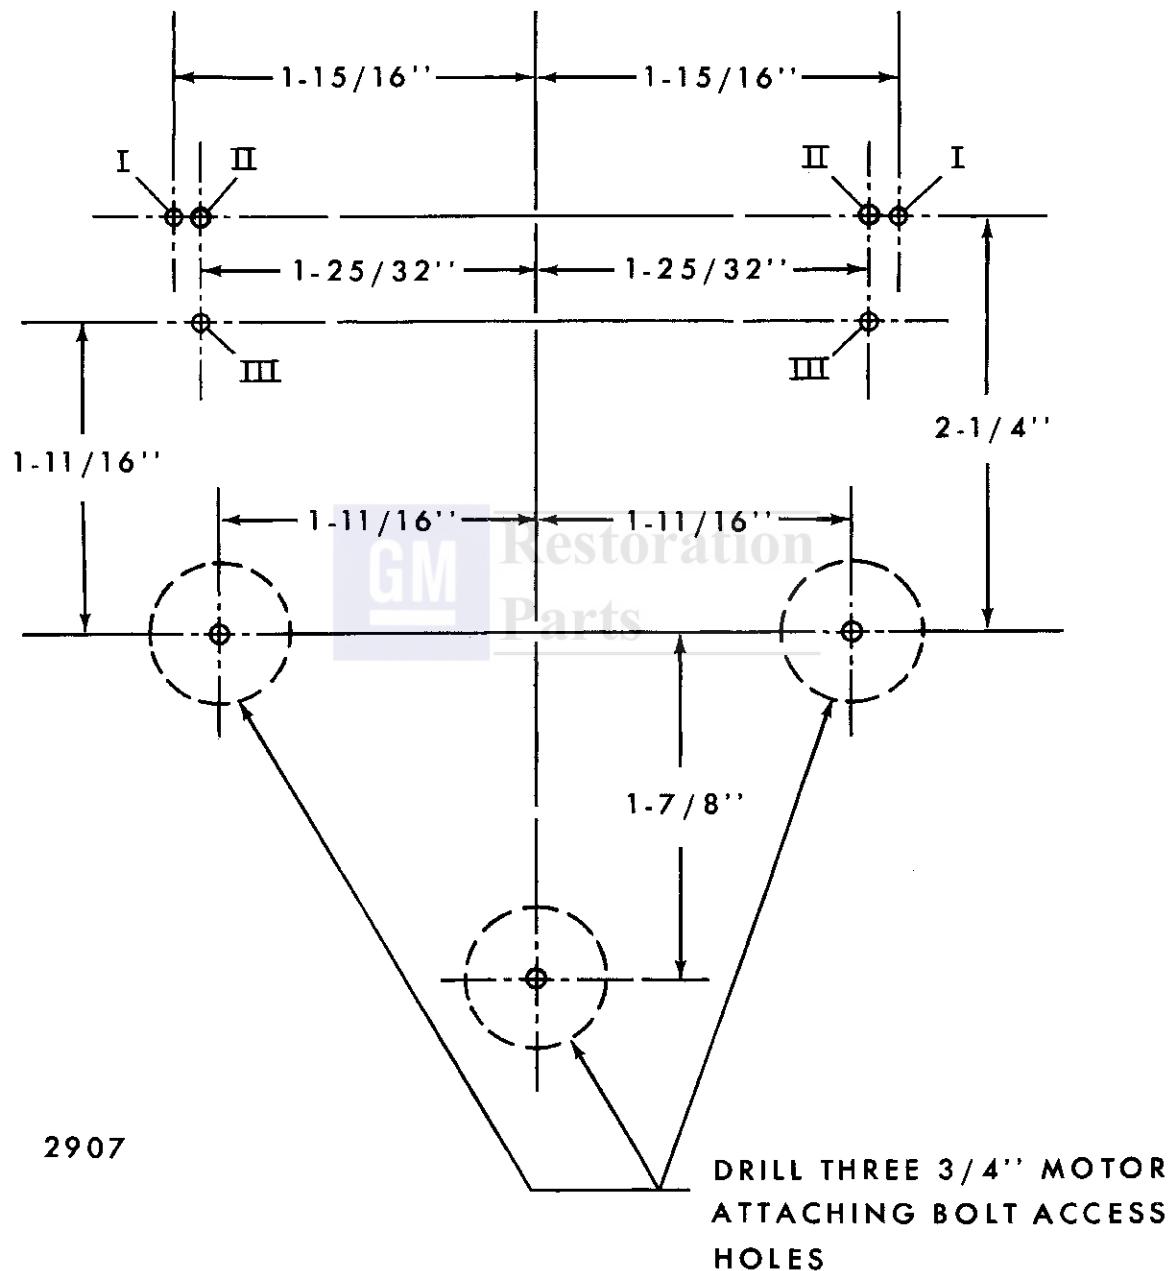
Window Regulator Lower Attaching Bolts Reference Points for Locating Window Motor to Regulator Attaching Bolts: "I" for "B and C-11-37-47-57 and 67" Style Front Doors; "II" for "C-69" Style Rear Doors; "III" for "B and C-39" and "C-49" Style Rear Doors
